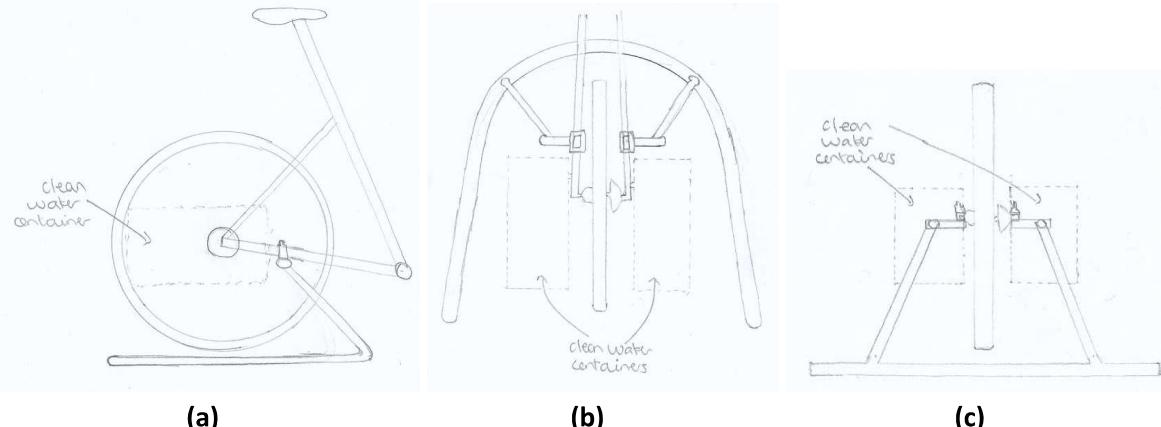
Bike stand design; (a)side view (b)top view (c)front view
